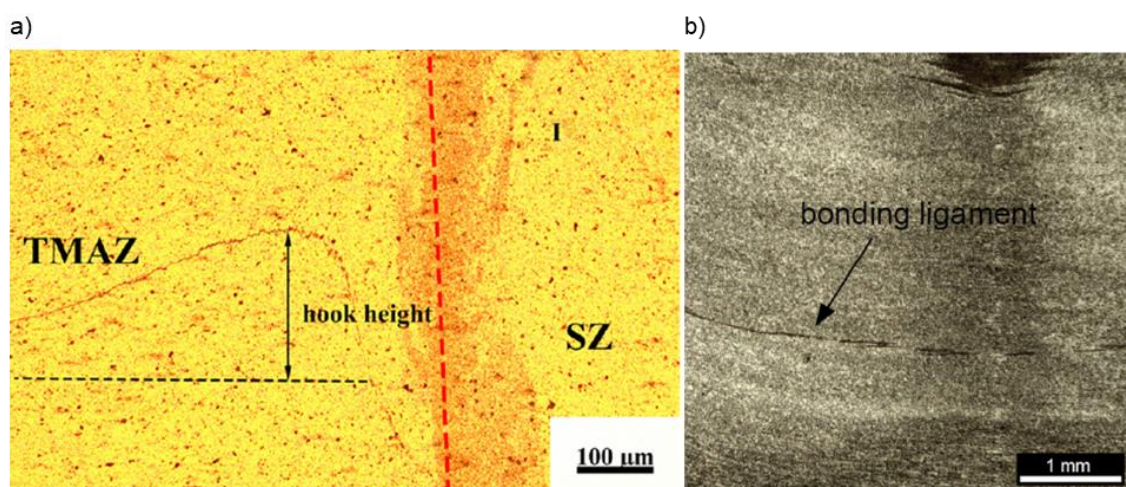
a) Hook defect in a AA6061-T6 RFSSW weld b) Bonding Ligament in a AA2198 RFSSW weld [9,26].
